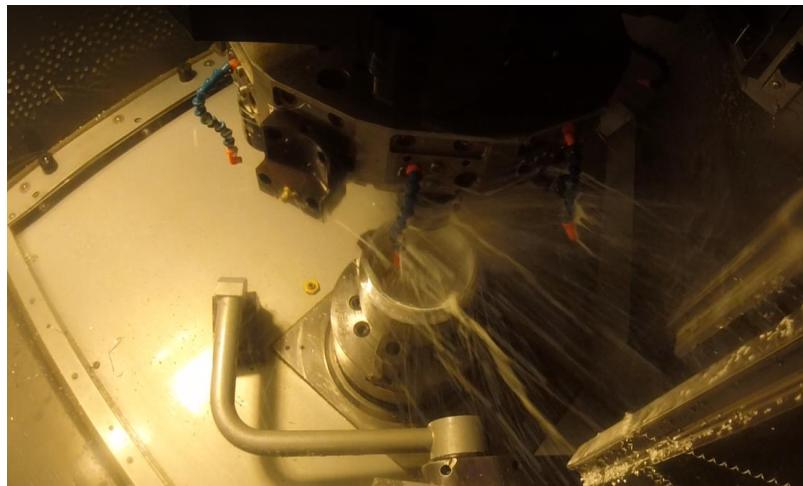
GoPro Footage of Axial Live Tooling on the Thrust Coupling
